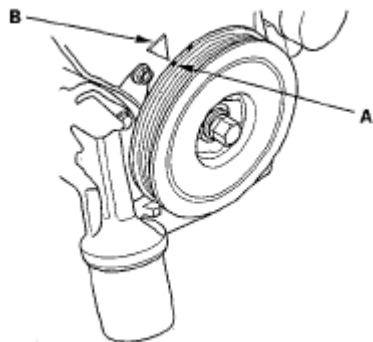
Identifying Timing Mark On Crankshaft Pulley
